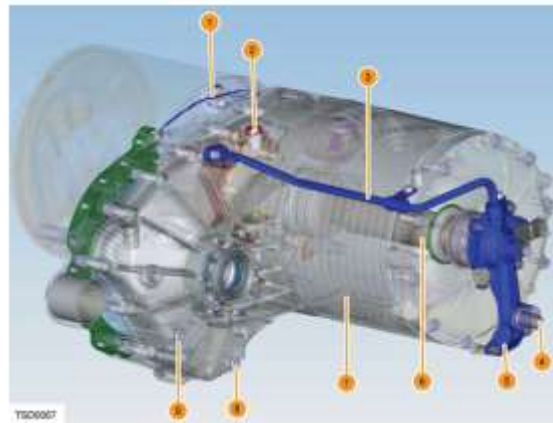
Tesla Model S electric drive cooling system: 1 – air removal; 2 – breather; 3 – coolant pipe; 4 – coolant inlet; 5 - coolant collector; 6 – rotary cooler; 7 – stator cooling jacket; 8 – plug for draining transmission oil; 9 - transmission oil filling / transmission oil level plug.
